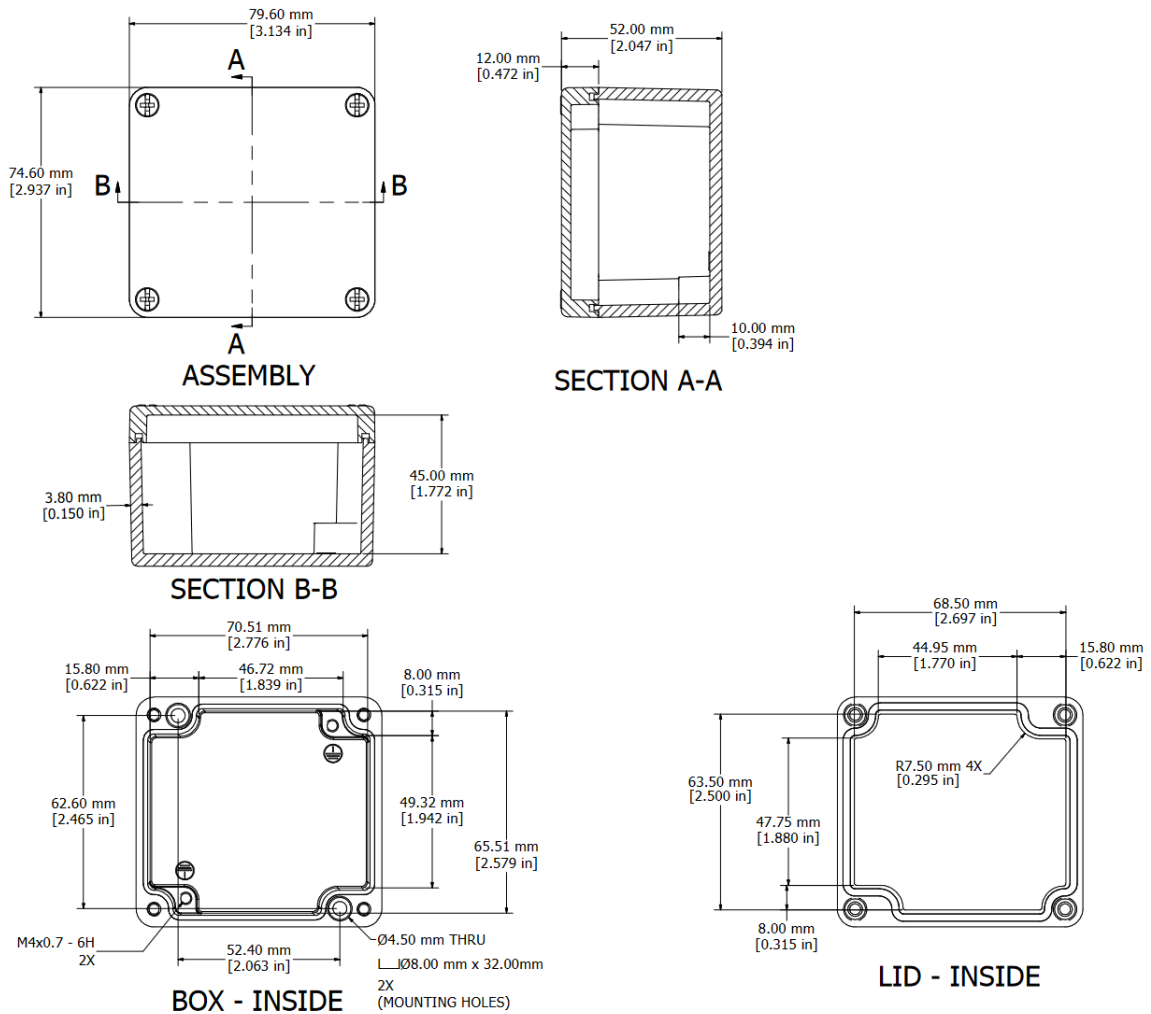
Schematics of the prototype IP66 enclosure Hammond Electronics 1590Z110 [128].
